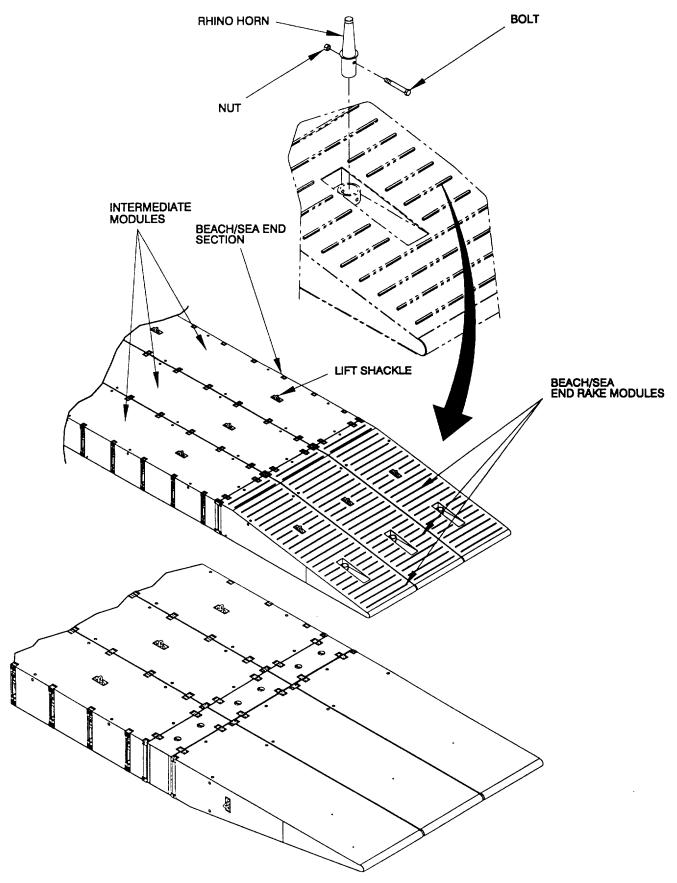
Deck Fittings, Fenders, and Rhino Horn Installation (Sheet 2 of 2).
